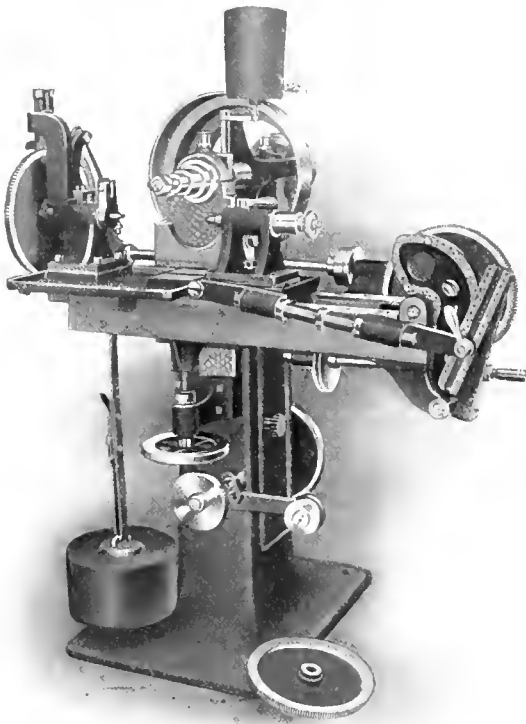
The Dwight Slate Cam Actuated Automatic Gear Cutter.
